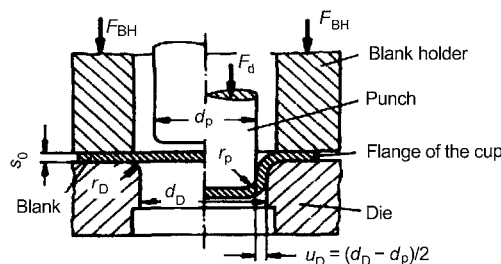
Tool geometry in the deep drawing process. Source: Ref 8.2
